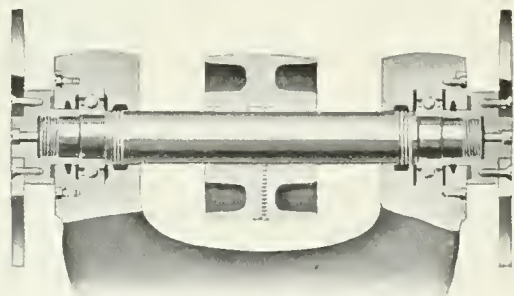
Sectional View of Disk Grinder Spindle Bearings
